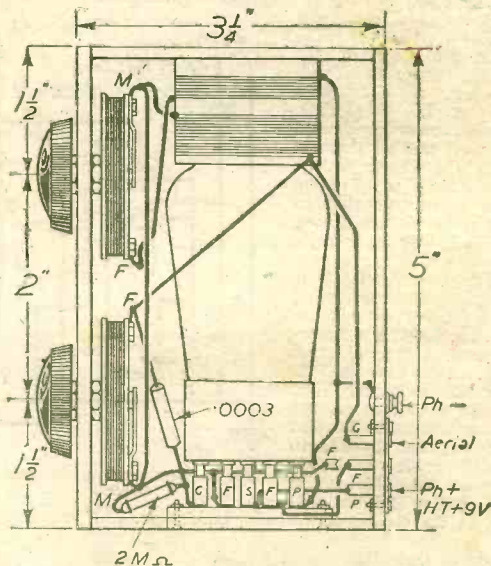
The receiver assembled and wired. Valve holder sockets shown in line for clarity.
